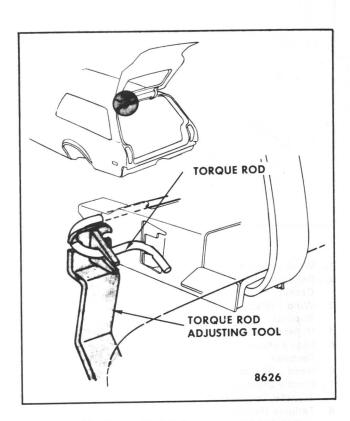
Torque Rod Adjustment - "H-15" Styles
